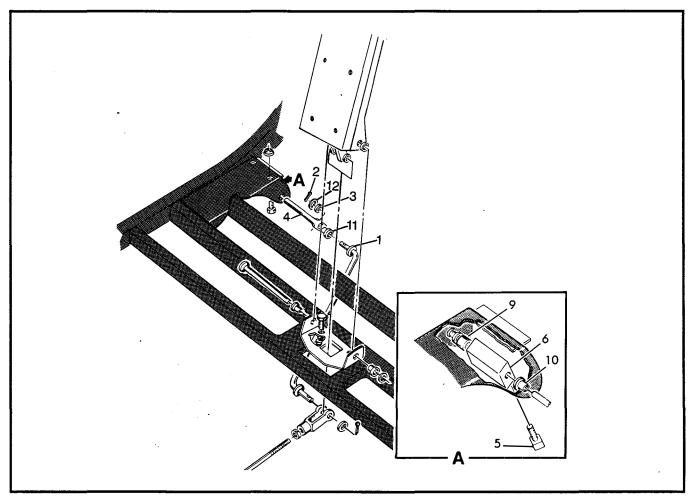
BRAKE "KICK OFF" LINKAGE
